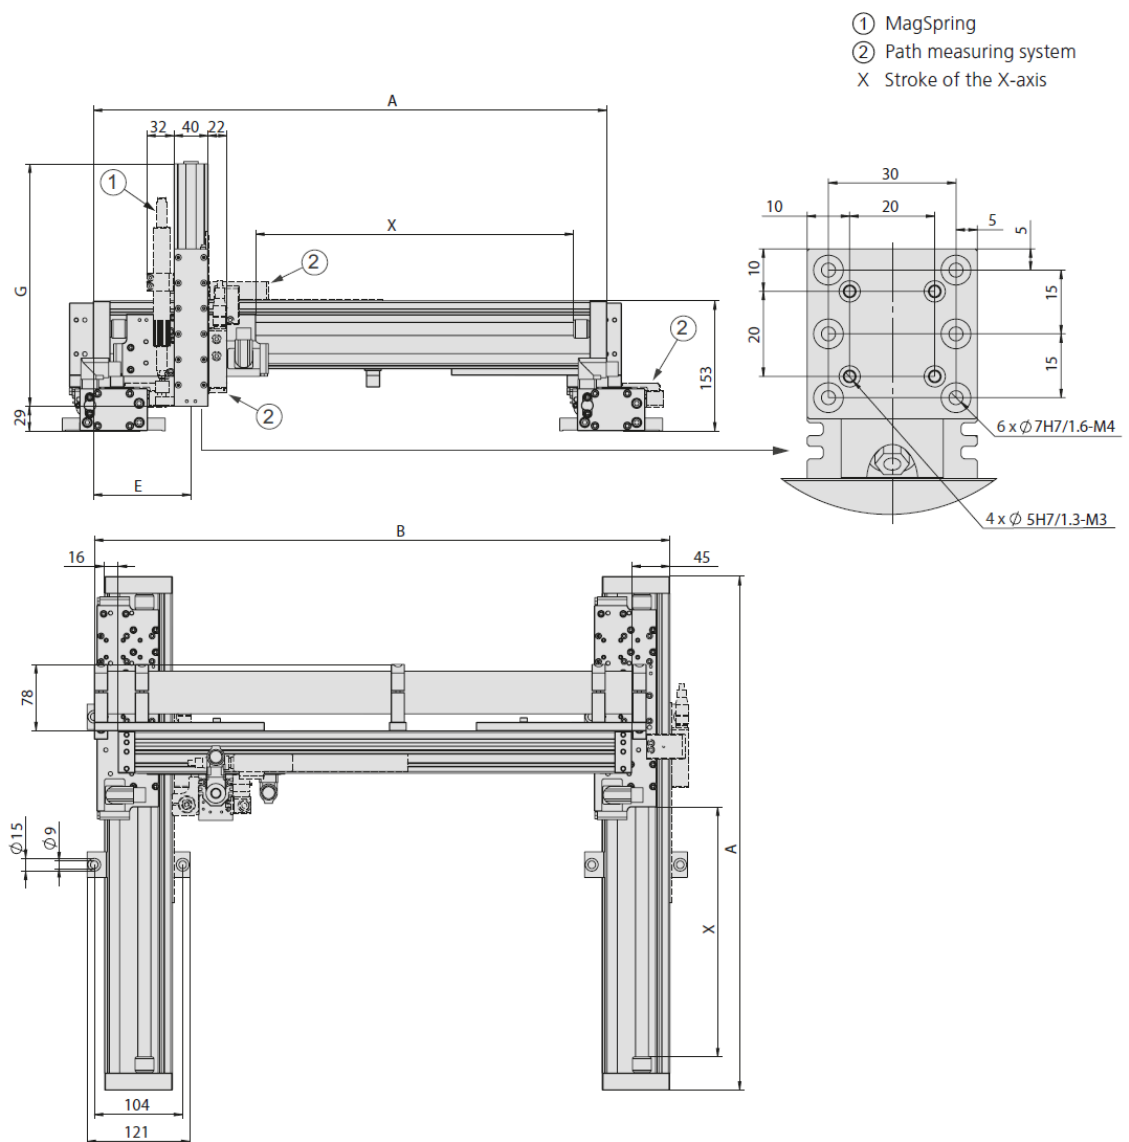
Dimensioned drawing EPS mini gantry XXYZ
